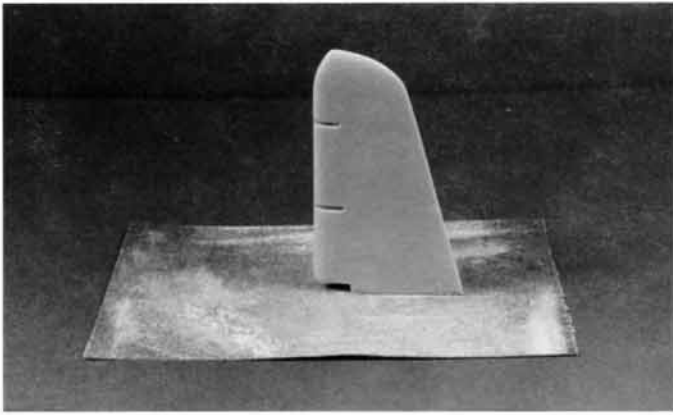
To flatten the contact point between the control surface and the pour block, run the control surface across a stationary piece of sandpaper. You need to be extra careful to hold the part flat so that you don't end up with an angled surface.
